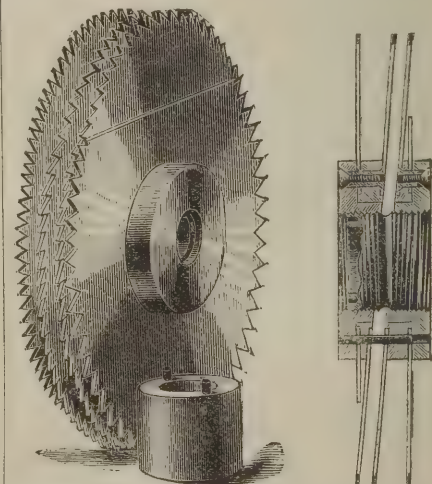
Adjustable Dado Head.—Fox Machine Company, Grand Rapids, Mich.
